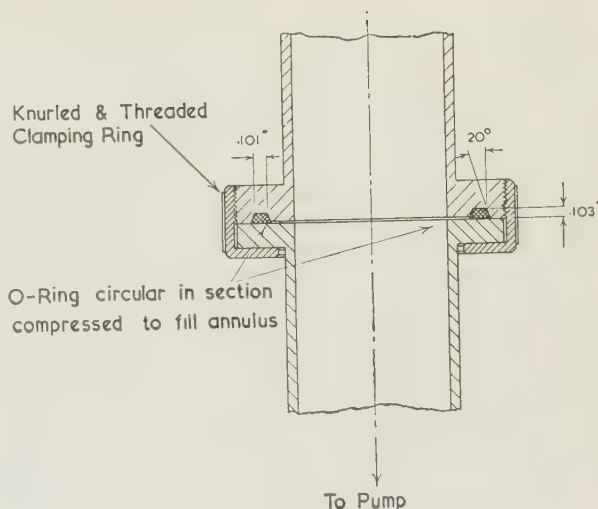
Vacuum seal which maintains accurate location of parts.
